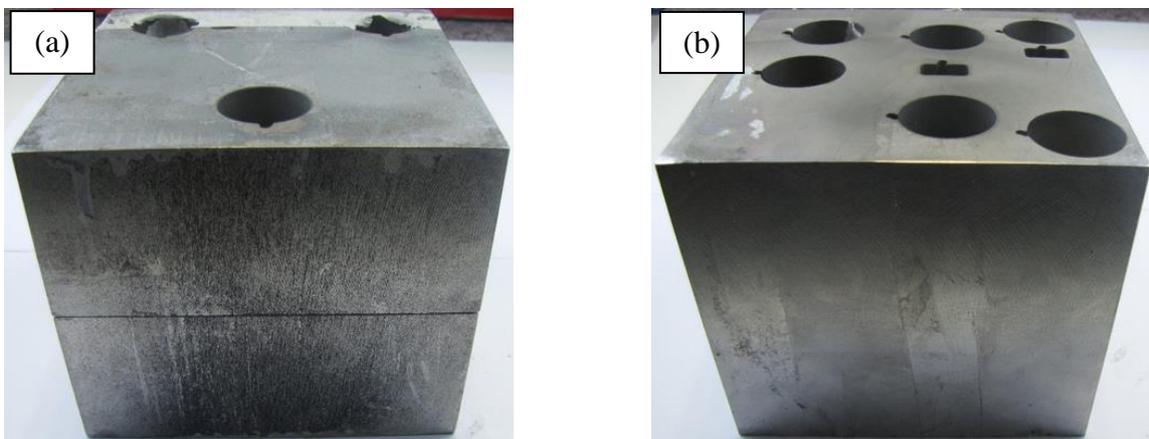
a) Sample after bonding and machining processes, b) As received material after thermal cycle and machining processes
